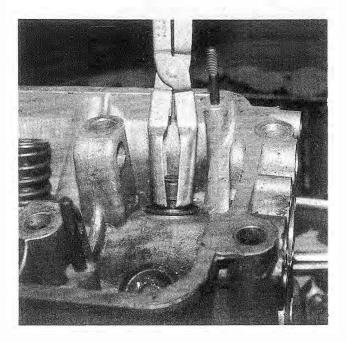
Valve stem oil seal being removed from valve guide using special removal tool.
